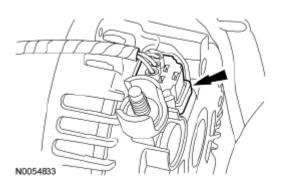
Locating Generator B+ Cable Courtesy of FORD MOTOR CO.
